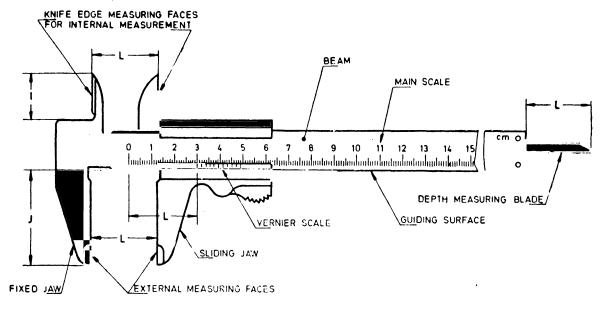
NOMENCLATURE AND DIMENSIONS FOR TYPE A VERNIER CALIPERS
